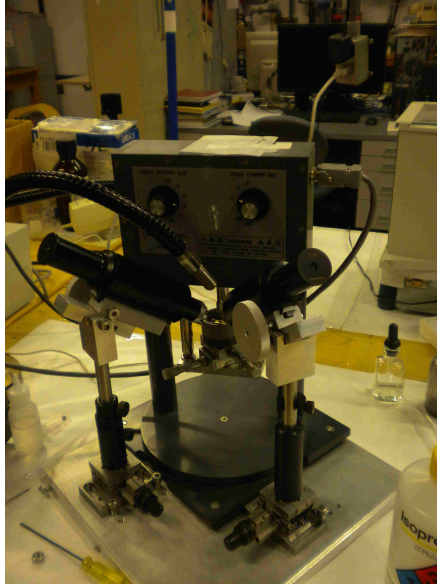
A picture showing the electric discharge machine apparatus.
